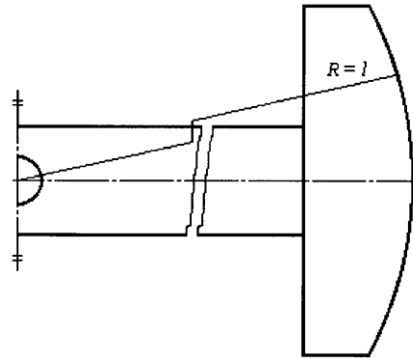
Front view of the 2 kN·m torque standard machine (IMGC)
